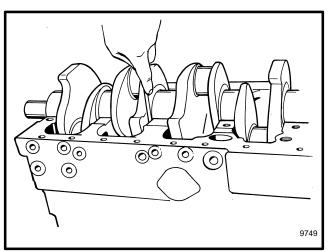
CHECK THE CLEARANCE BETWEEN THE CRANKSHAFT AND THRUST BEARINGS
